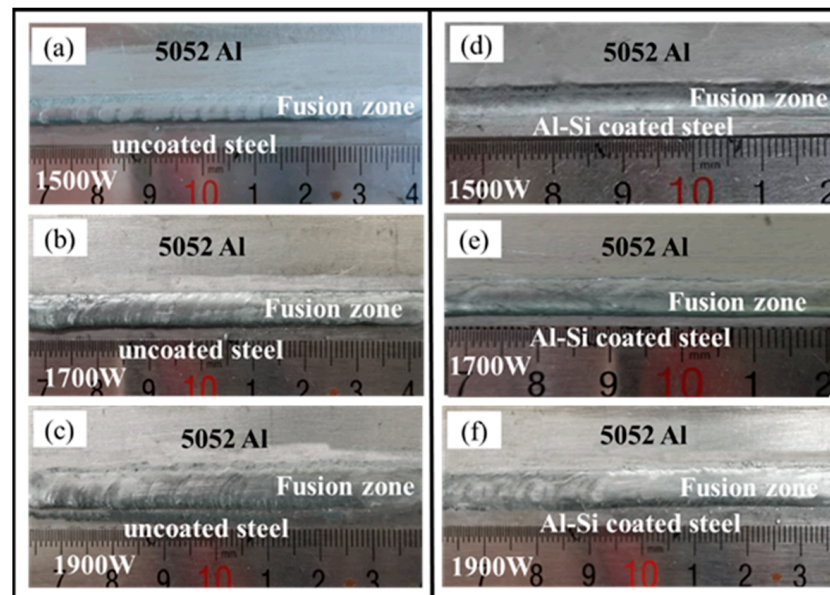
Macroscopic morphology of welding joints with the laser power from 1500 W to 1900 W: (a–c) Al/uncoated steel joints; (d–f) Al/Al-Si coated steel joints.
